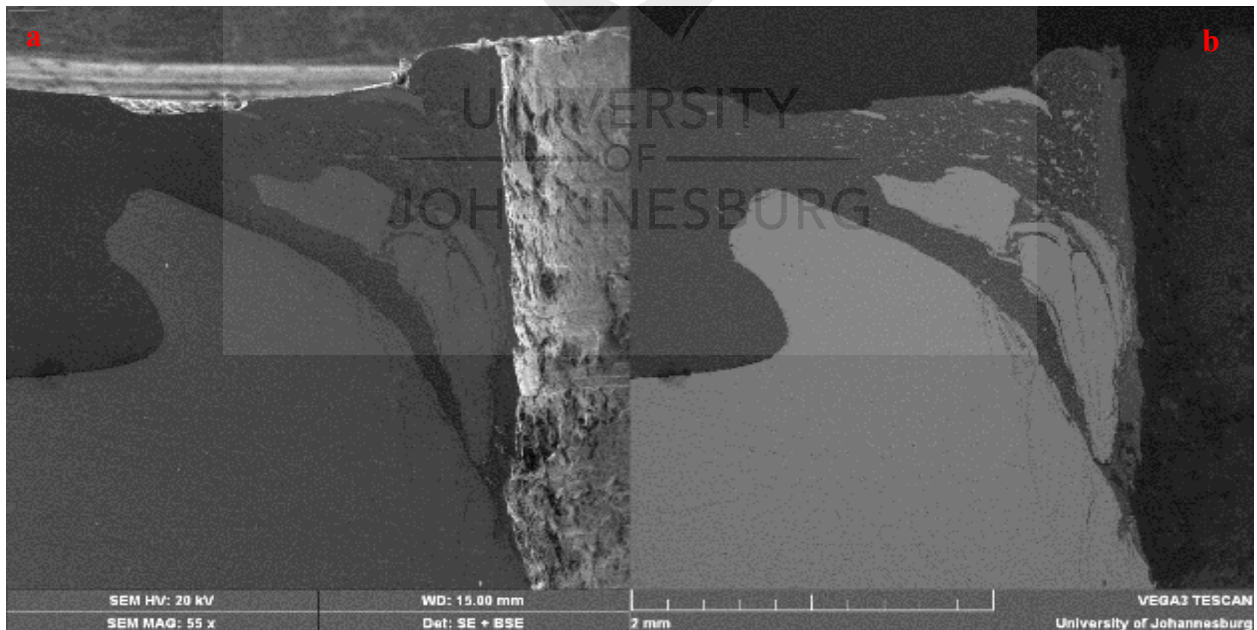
Showing a secondary electron (a) and a backscattered electron (b) images of the spot weld produced at 1200 rpm and 1 mm plunge depth using a flat pin and a flat shoulder tool
